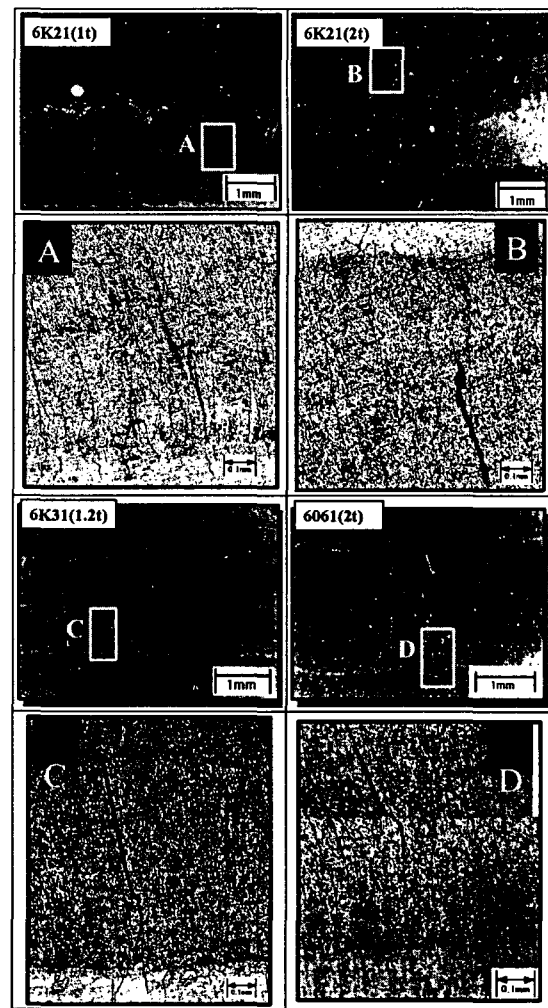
Upper beads of Nd:YAG laser welds in the Al-Mg-Si aluminum alloys. (non shielding).
